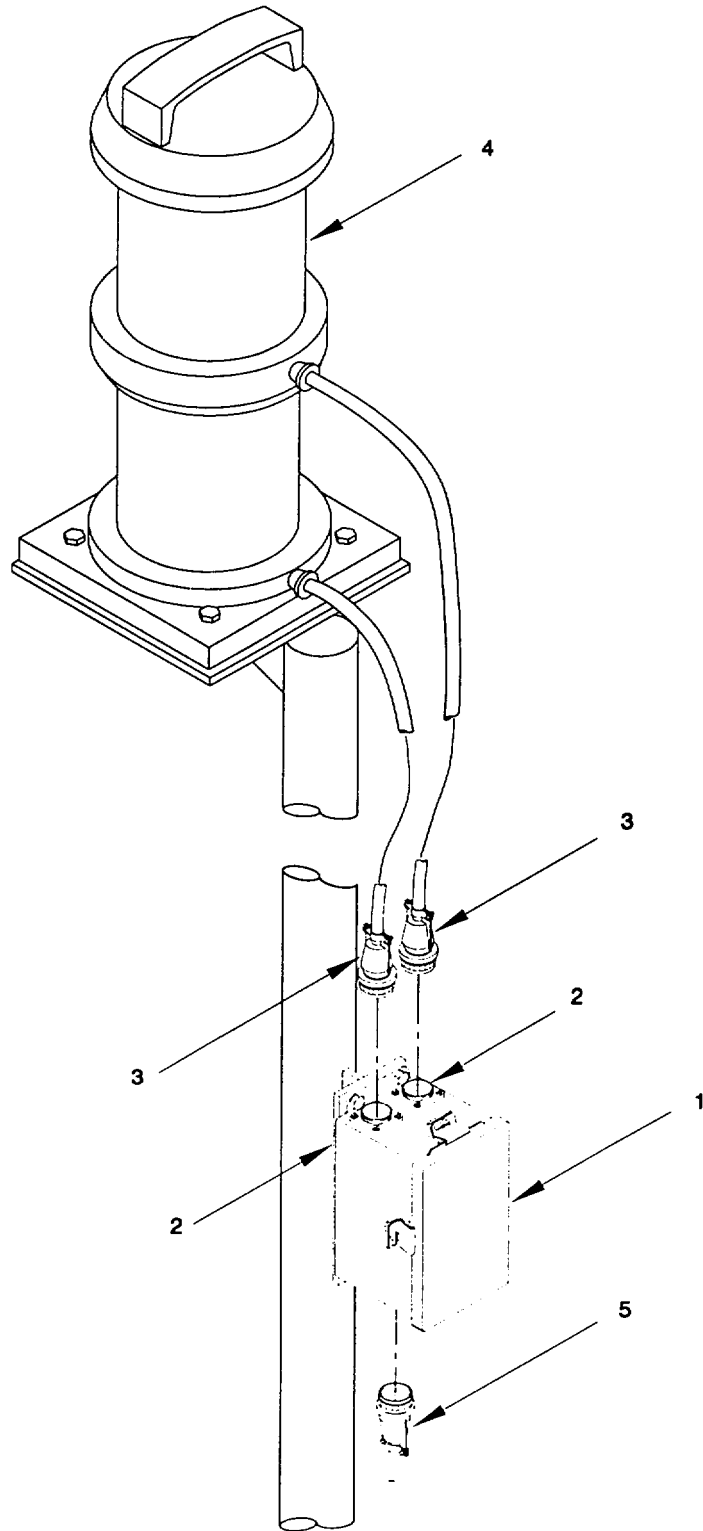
Cables and Enclosure Assembly, Inspect/Repair.
